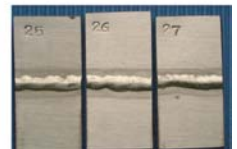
Corrosion resistance of weldments in corrosion-resistant alloys in boiling Green Death test medium.
